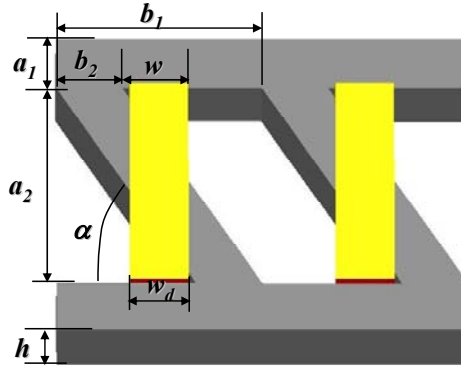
The dimension definition of the Z-core coupled-inductor
